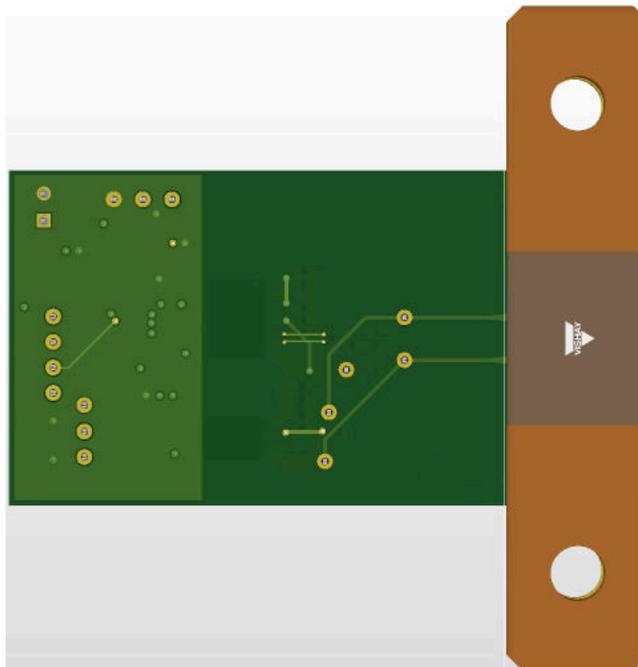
AMC-AMP-200A-EVM Bottom PCB Drawing
